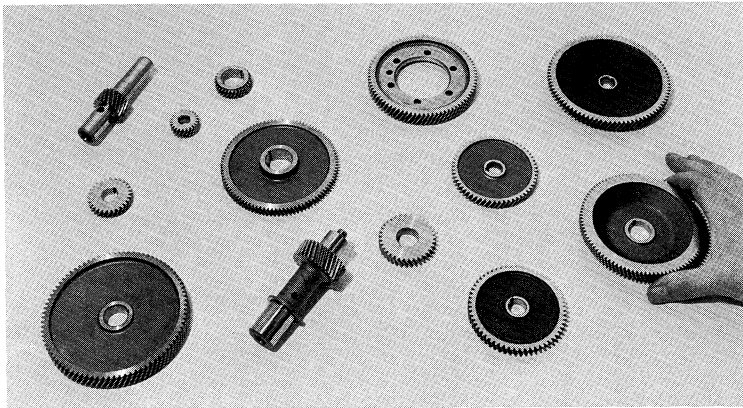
These thirteen gears were made for a research gas turbine designed to drive a small, light car. The gears include power turbine 1st and 2nd reduction gears (two in each set), accessory drive 1st and 2nd reduction gears (two in each set), accessory drive 3rd and 4th reduction gears, and three accessory gears.
